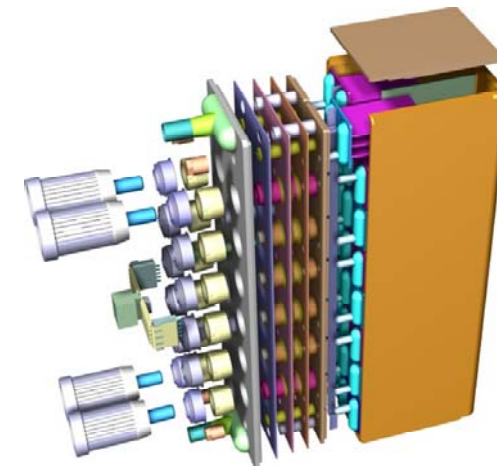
Exploded view of a generic HCLL-DEMO-2007 blanket module.
